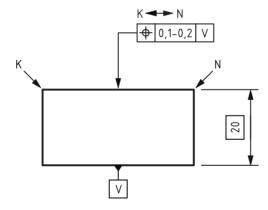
Specification of a linearly variable tolerance zone
